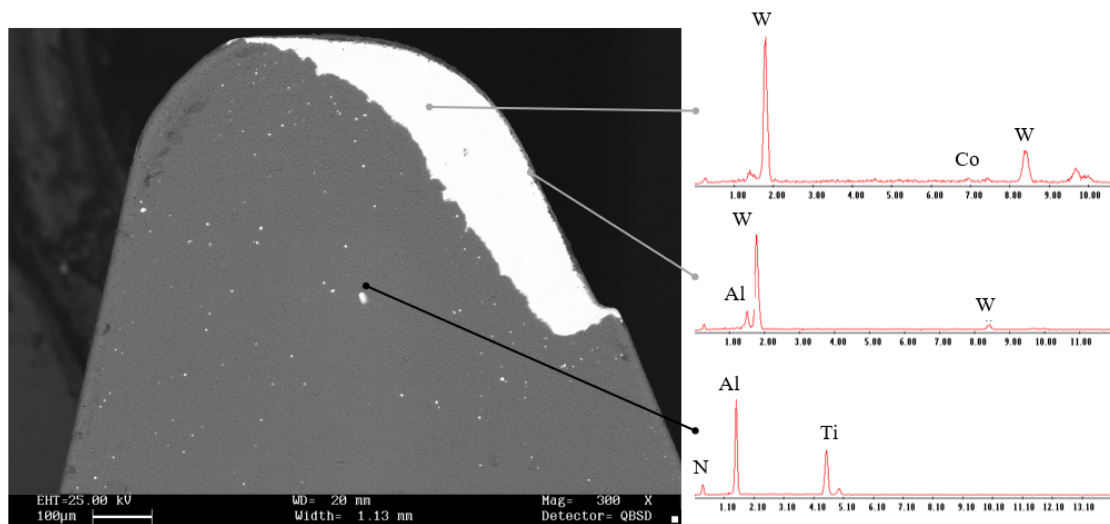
Tool after etching: feed of  $f = 0,06 \text{ mm rev}^{-1}$ , cutting speed of  $V_c = 60 \text{ m min}^{-1}$  and material removal of  $MR = 660 \text{ mm}^3$  using conventional turning
